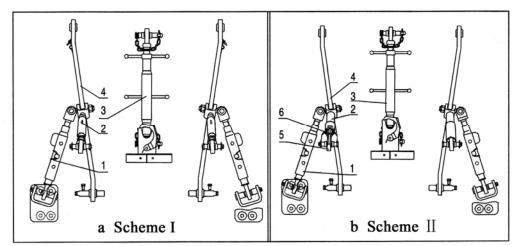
Elementary Diagram of Adjusting Suspending Mechanism 1- Gag Lever Post 2- Lifting Lever 3- Upper Link 4- Draught Link 5- Regulating Handle 6- Locking Spring
